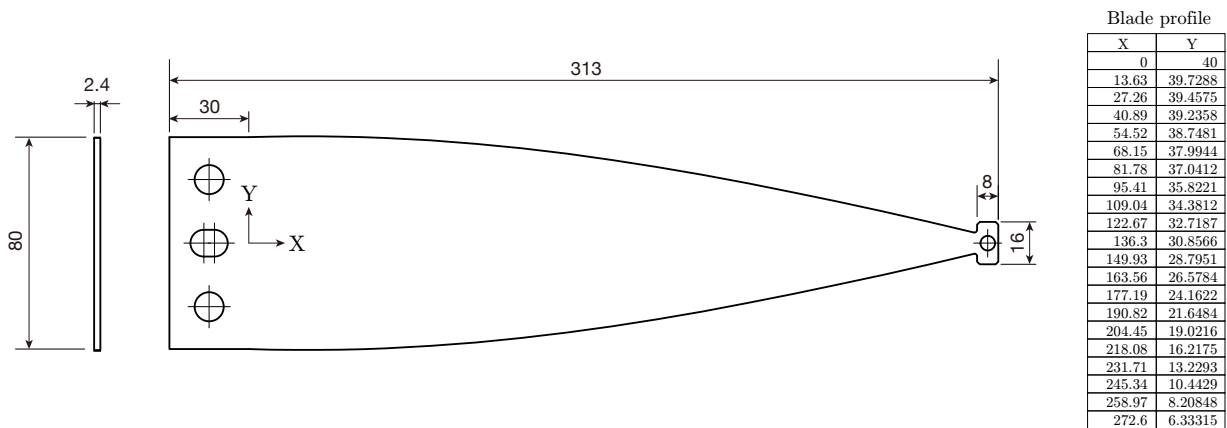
Dimension of a cantilever blade for the standard GAS filter in Type-A suspension.
